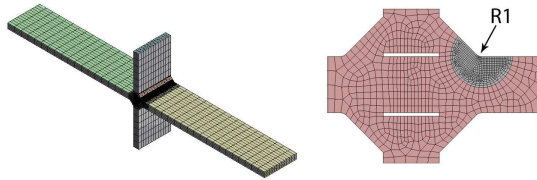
Lif1-specimen: element size in the notch is 0.1mm . Only the weld toe is considered here.
